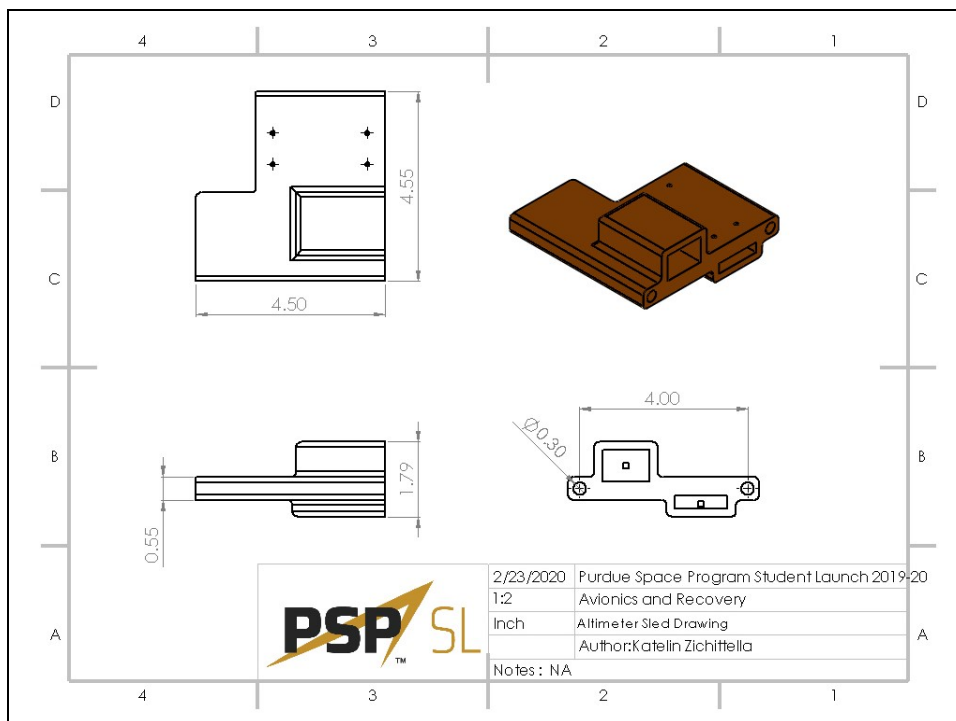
Altimeter Sled (With Built-In Battery Compartment) Dimensional Drawing
